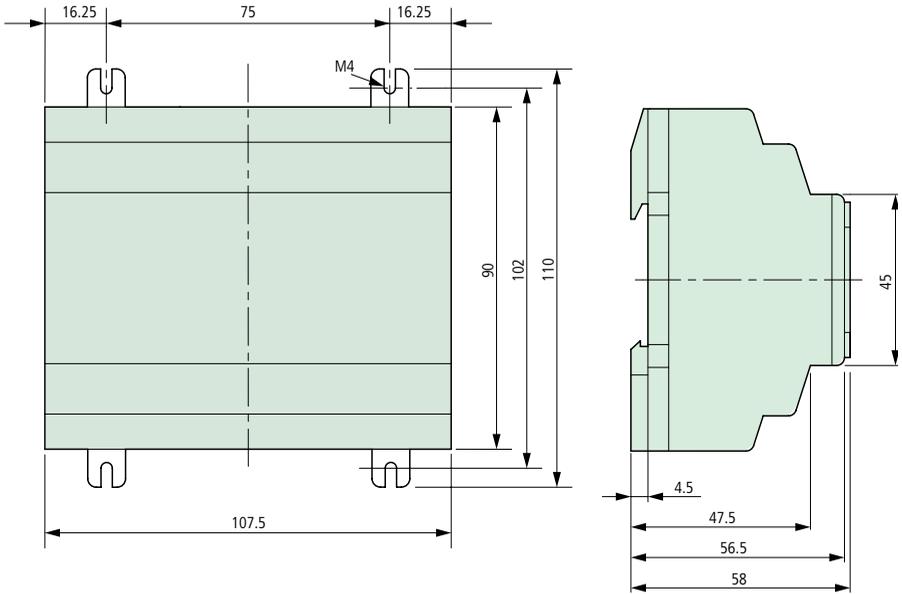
Dimensions CL-LMR/CL-LMT in mm
